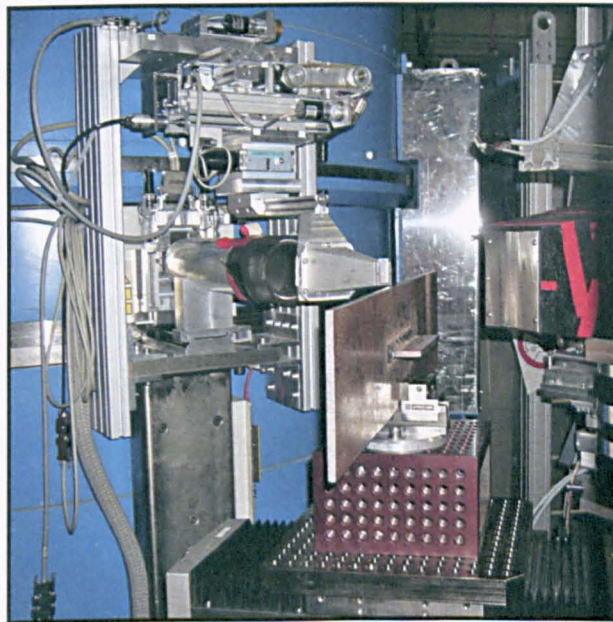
Steel Fillet welded specimen setup for residual stress measurement using neutron diffraction at FRMII, Munich.
